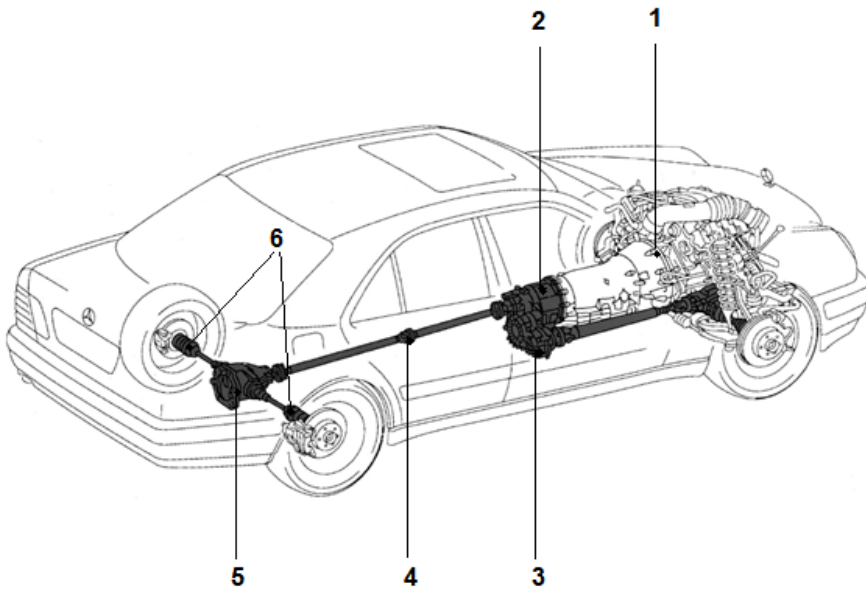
The key elements of power drive. 1) engine, 2) clutch, 3) gearbox, 4) Cardan joint, 5) differential, 6) drive axle [2]
